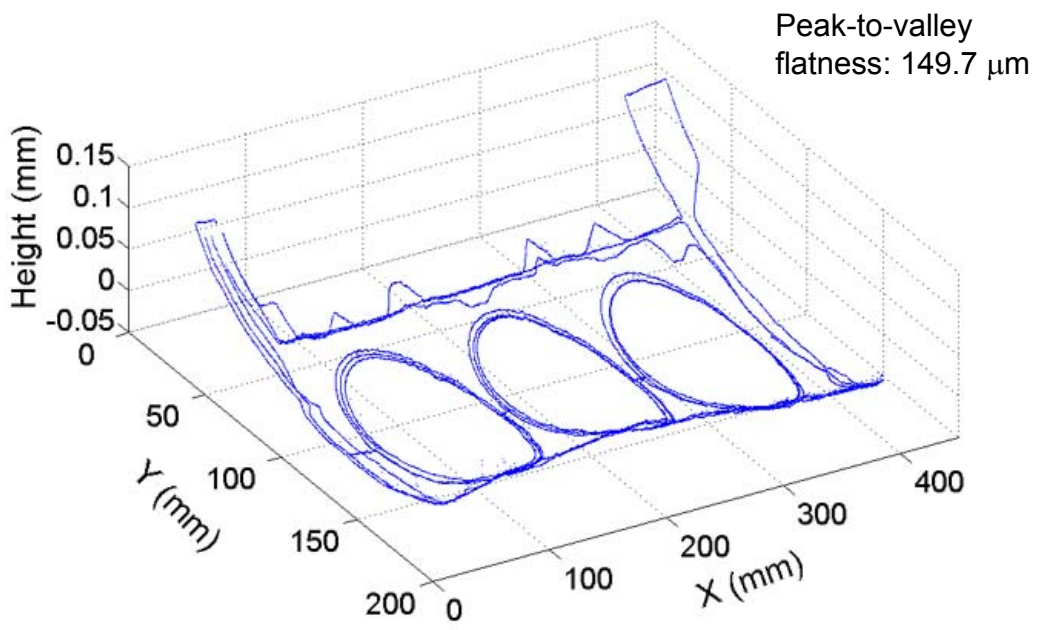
Overview of a V6 engine head combustion deck surface.
